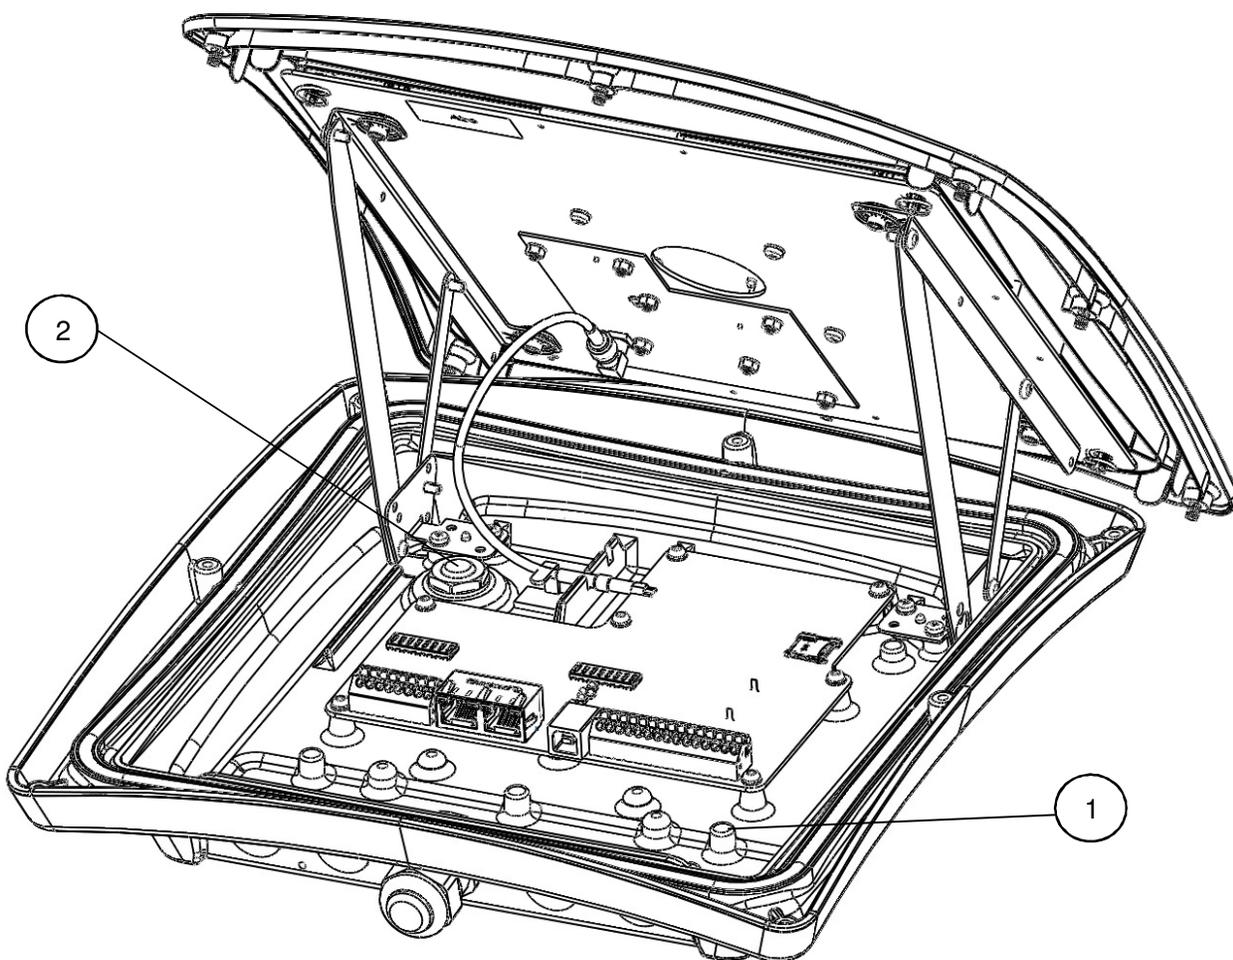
XT-1 overview (Pos. 1 is ground screw connection, Pos.2 is ventilating membrane)
